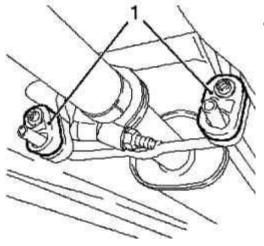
Removing the front exhaust pipe: 1 - rubber bearing
